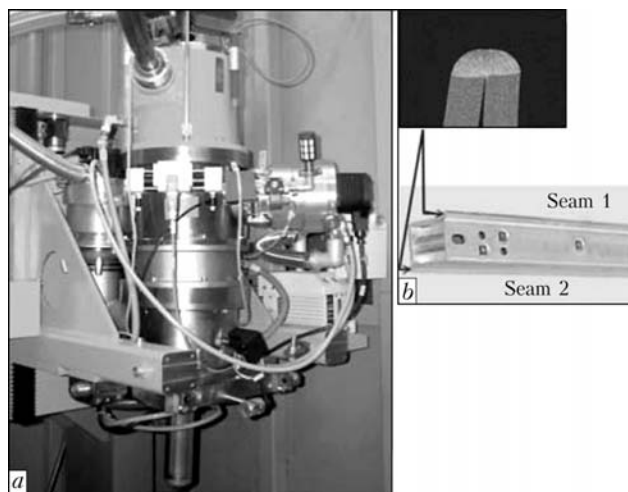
NV-EBW gun (a) and welded aluminium hollow-sections (b)
